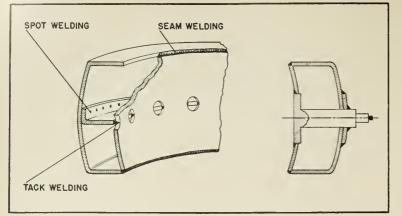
Gimbal Ring Section. V-2 missile used stabilized platform fabricated in this manner.
